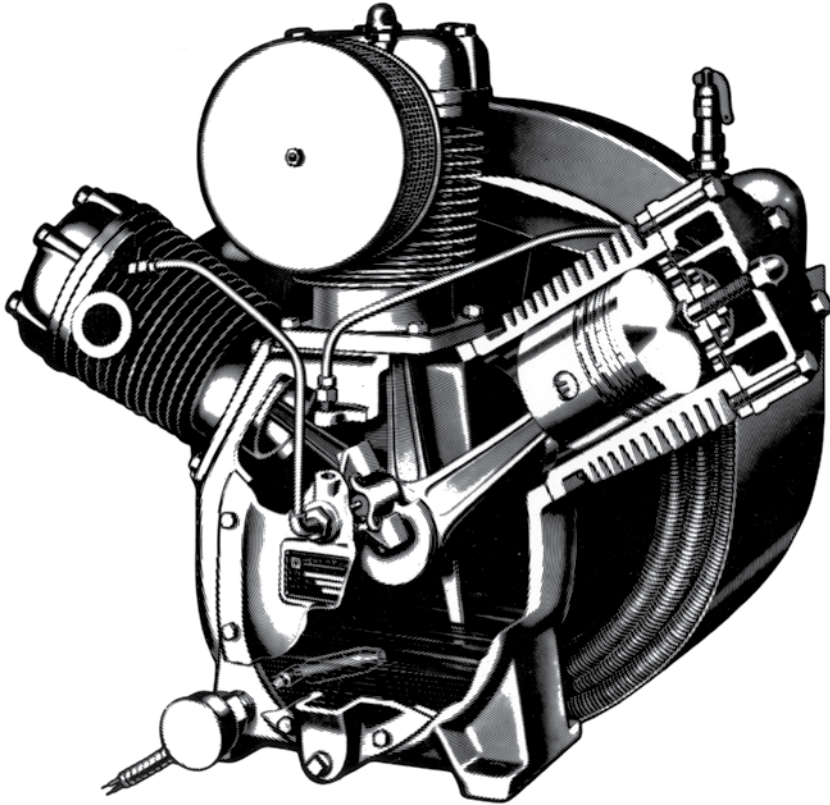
Splash-feed lubrication showing oil dipper and oil level float gage.
